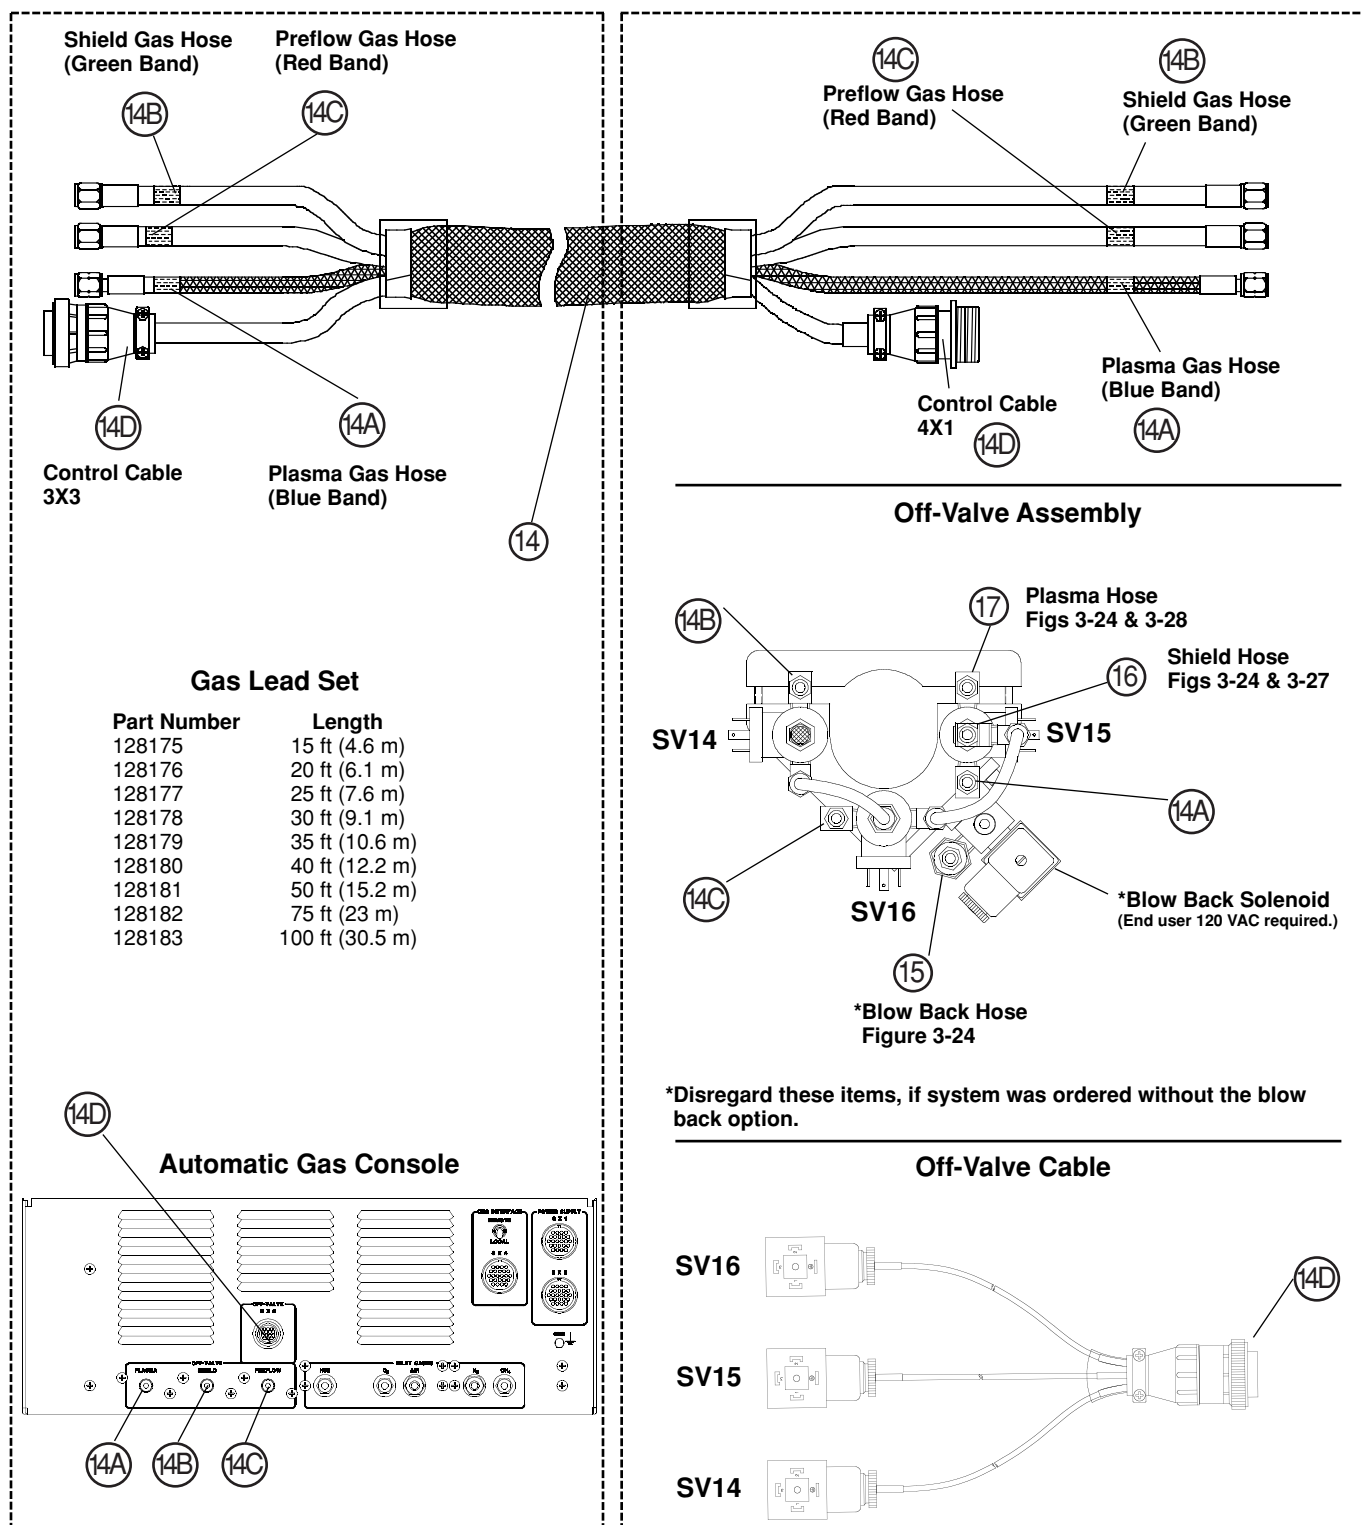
Gas Console to Off-Valve Assembly Interconnections
